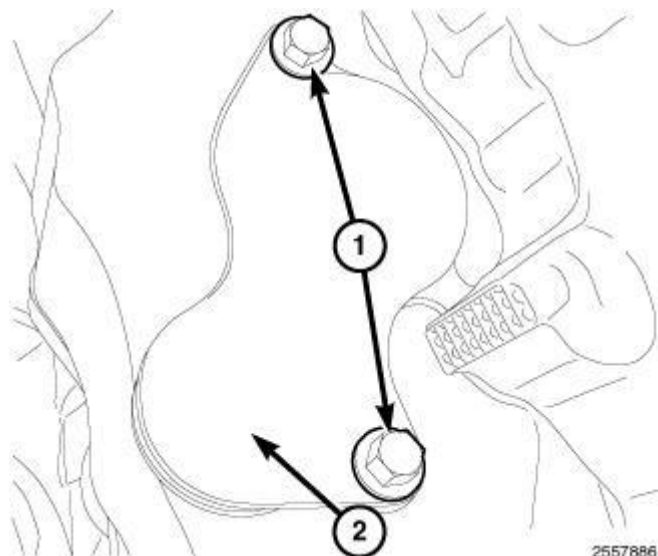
Identifying Bolts & Bell Housing Access Cover
